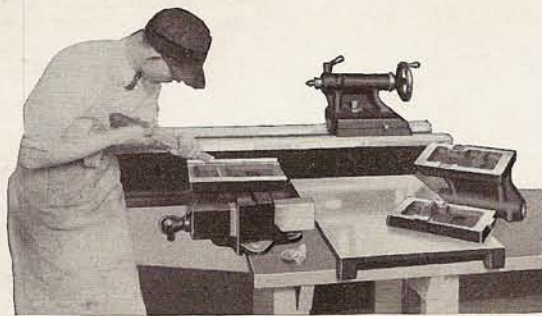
Scraping Tail Stock Base to Lathe Bed
